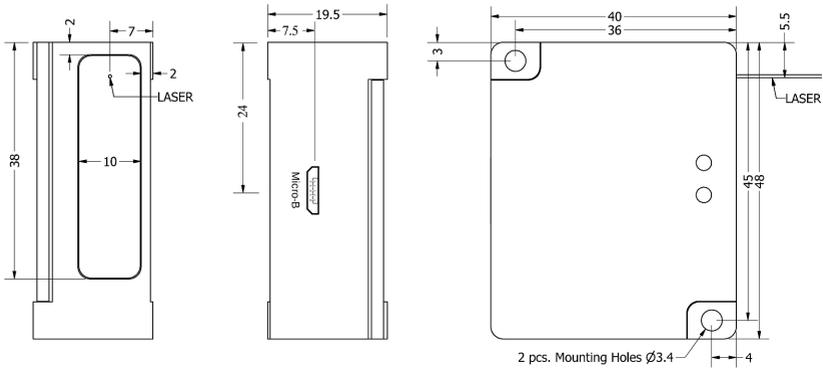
Dimensions, Front, Rear & Upside (Micro-B Connection).
